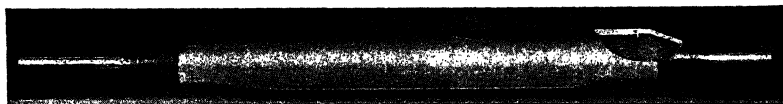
Centrifugally cast dry shaft with welded necks. Portion cut away to show welded joint.
